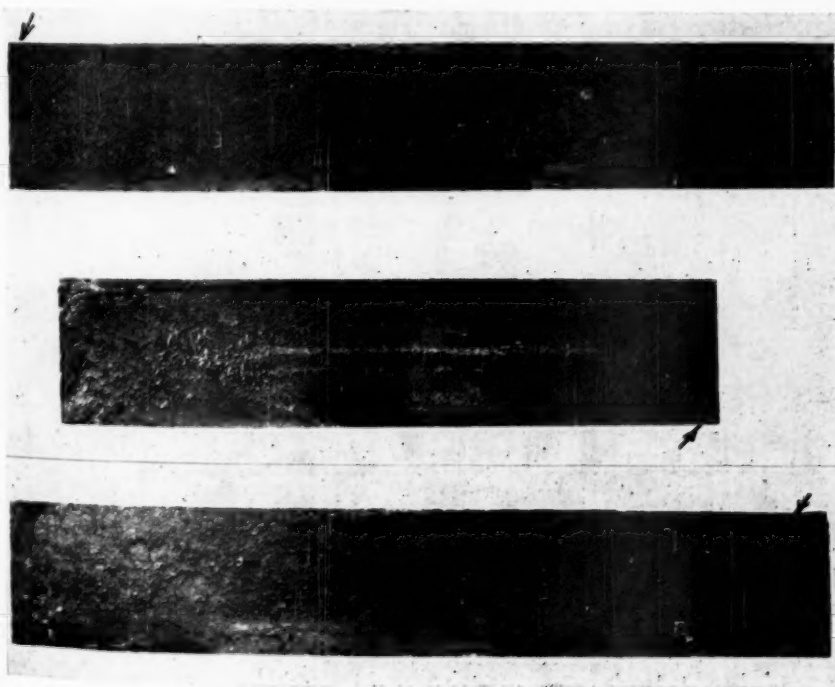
Fatigue Fractures in Cantilever Steel Specimens. Arrows indicate the approximate location where the fracture started.
